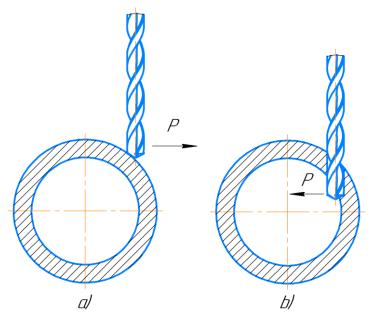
The force on the tool when performing a drill operation (P) a) at the beginning of the drill, b) at the end of the drill.
